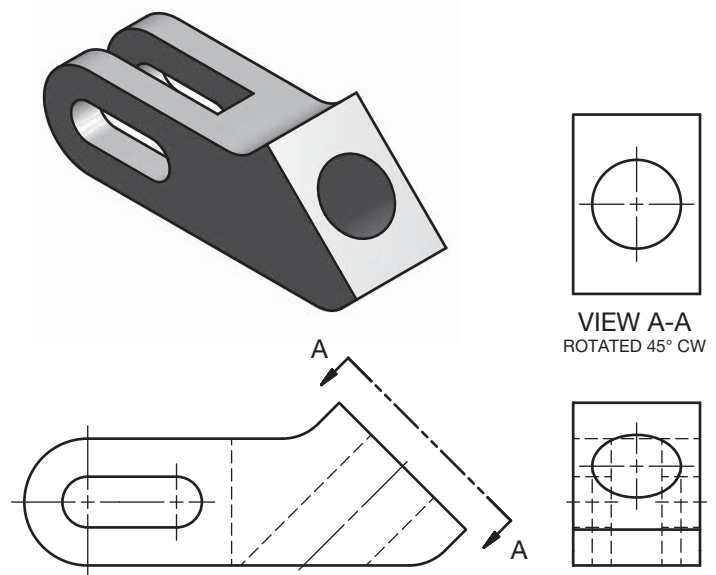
Establishing a rotated auxiliary view with a viewing-plane line. © Cengage Learning 2012
